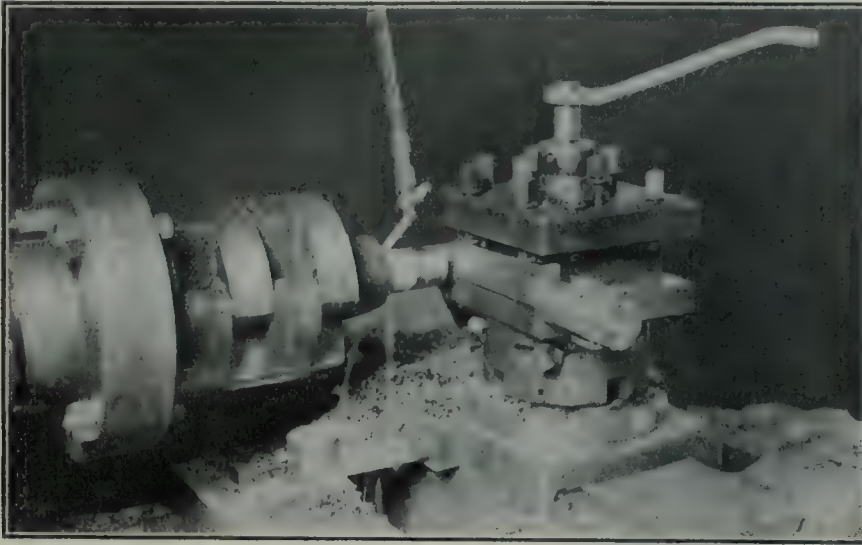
IMPROVED TURRET ATTACHMENT ON A STANDARD ENGINE LATHE.
